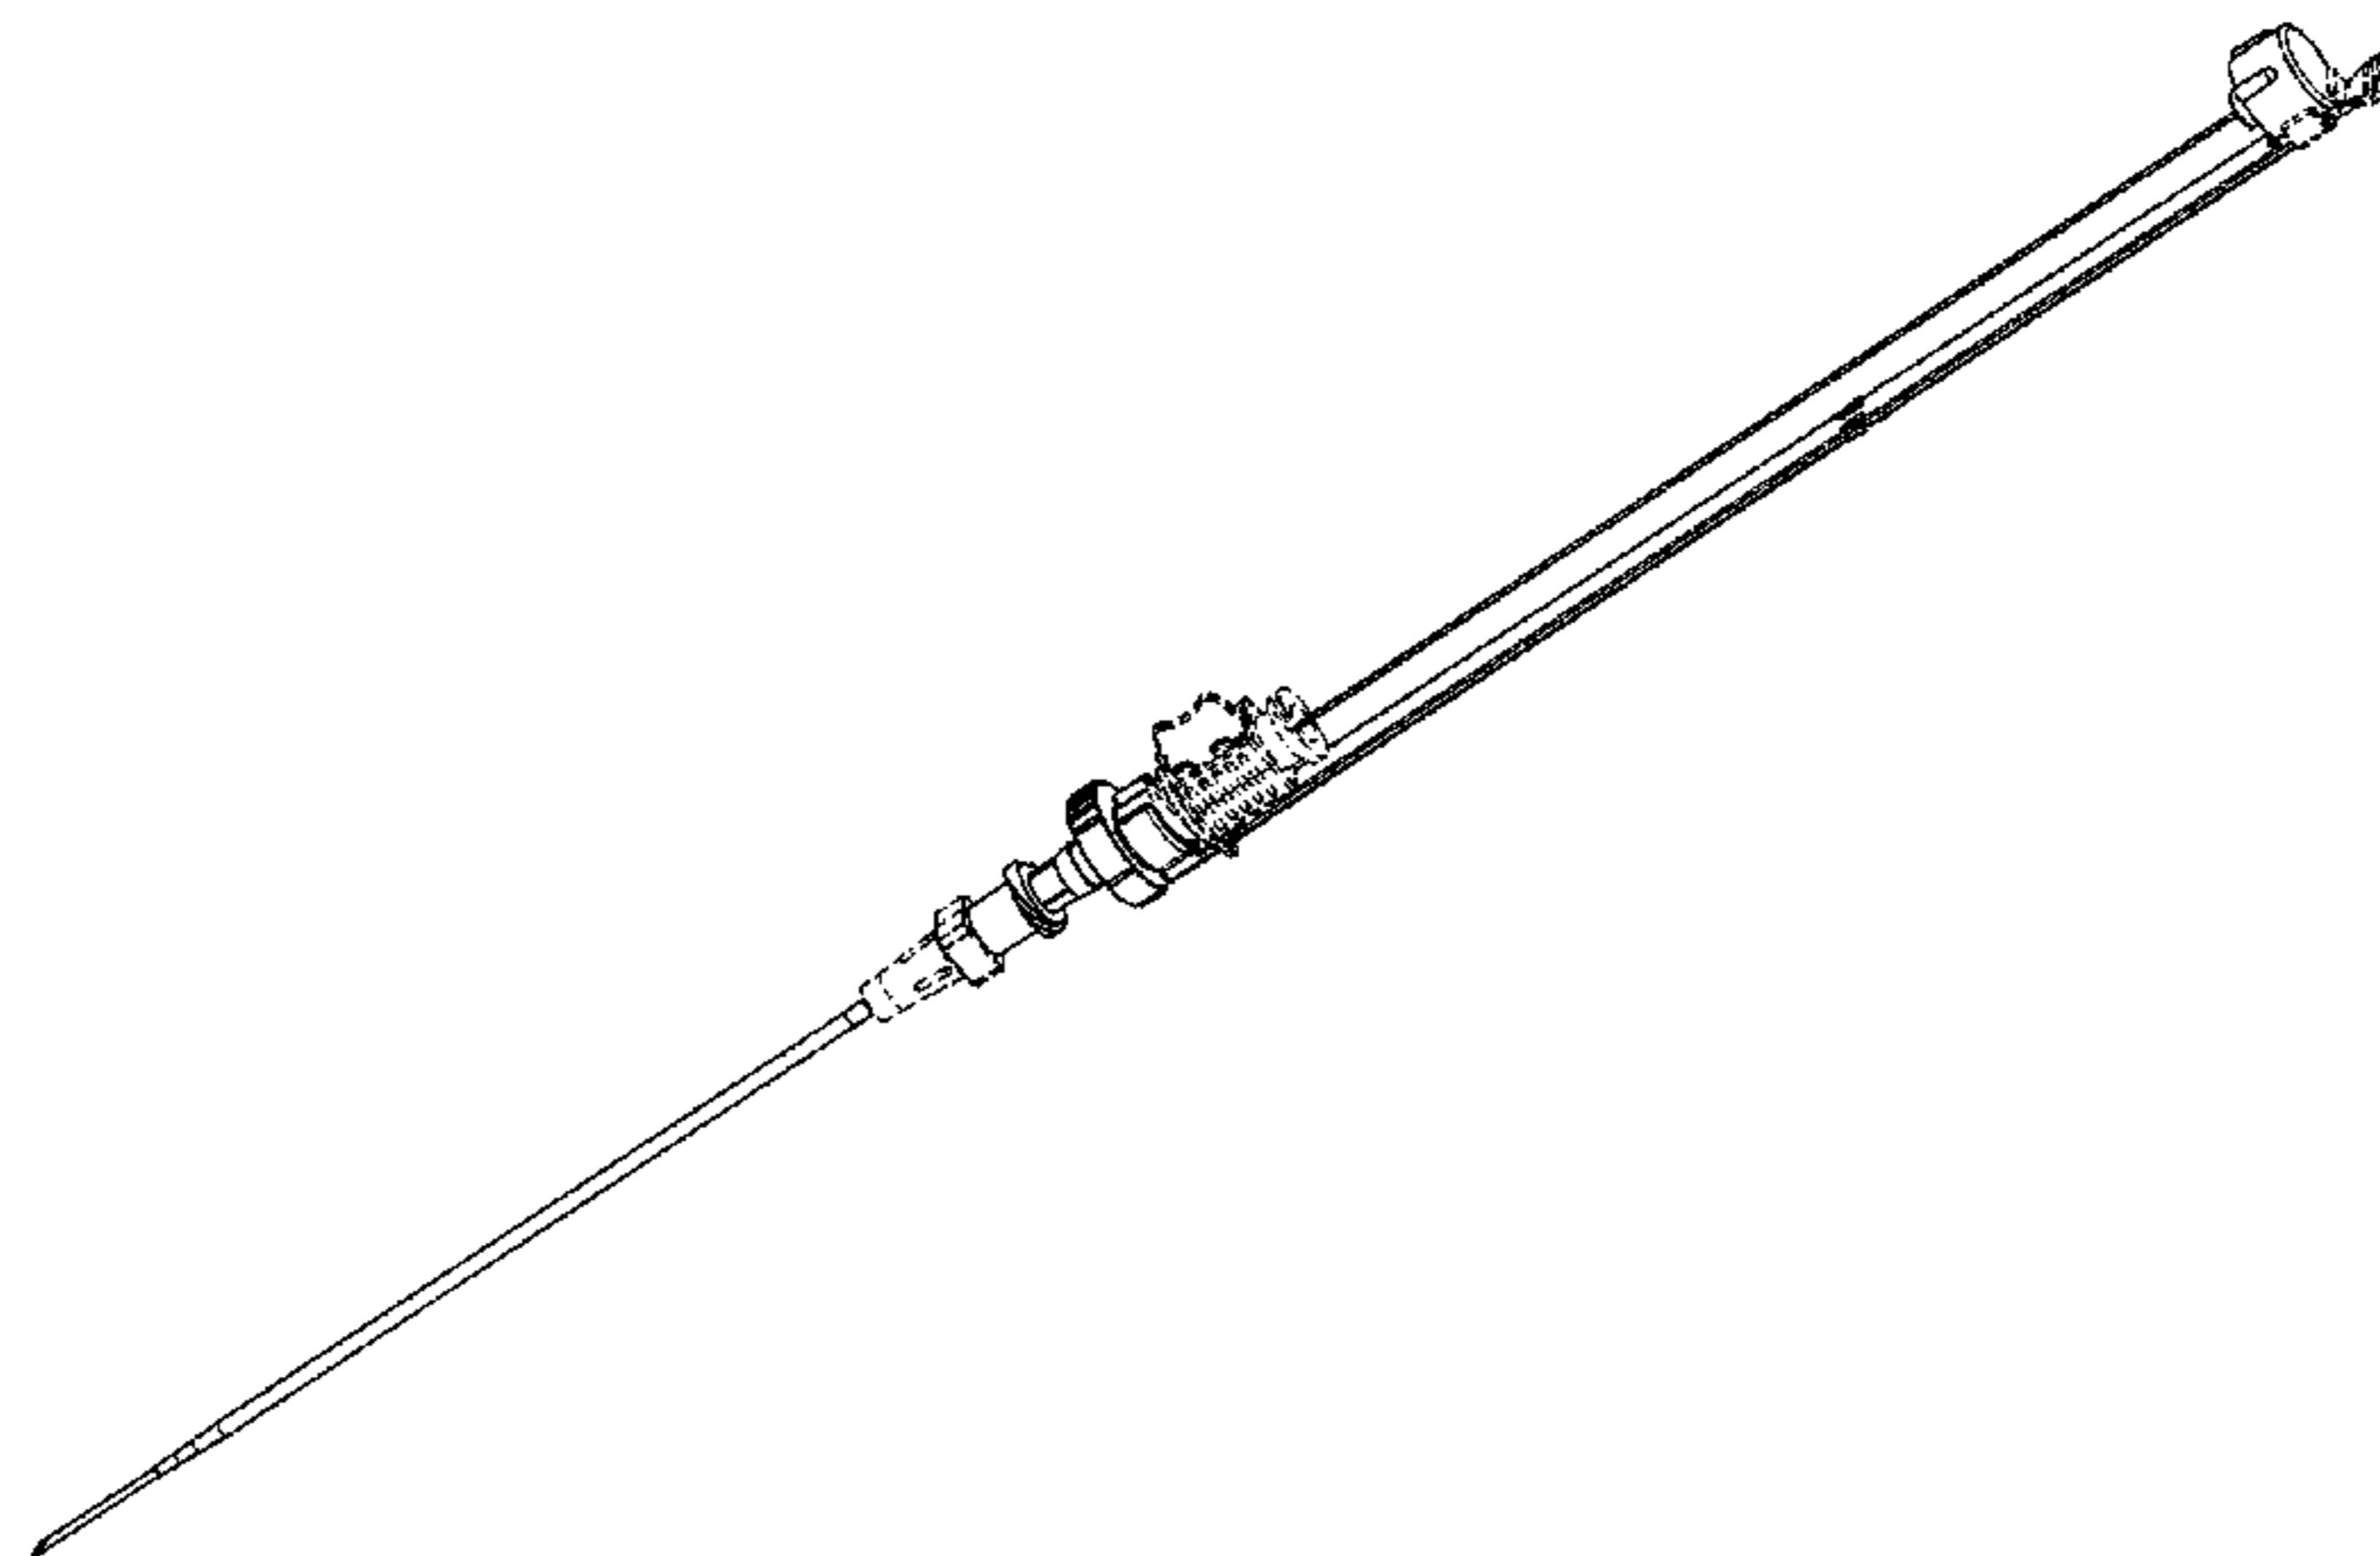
is a bottom view of the access device shown in FIG. 7;
